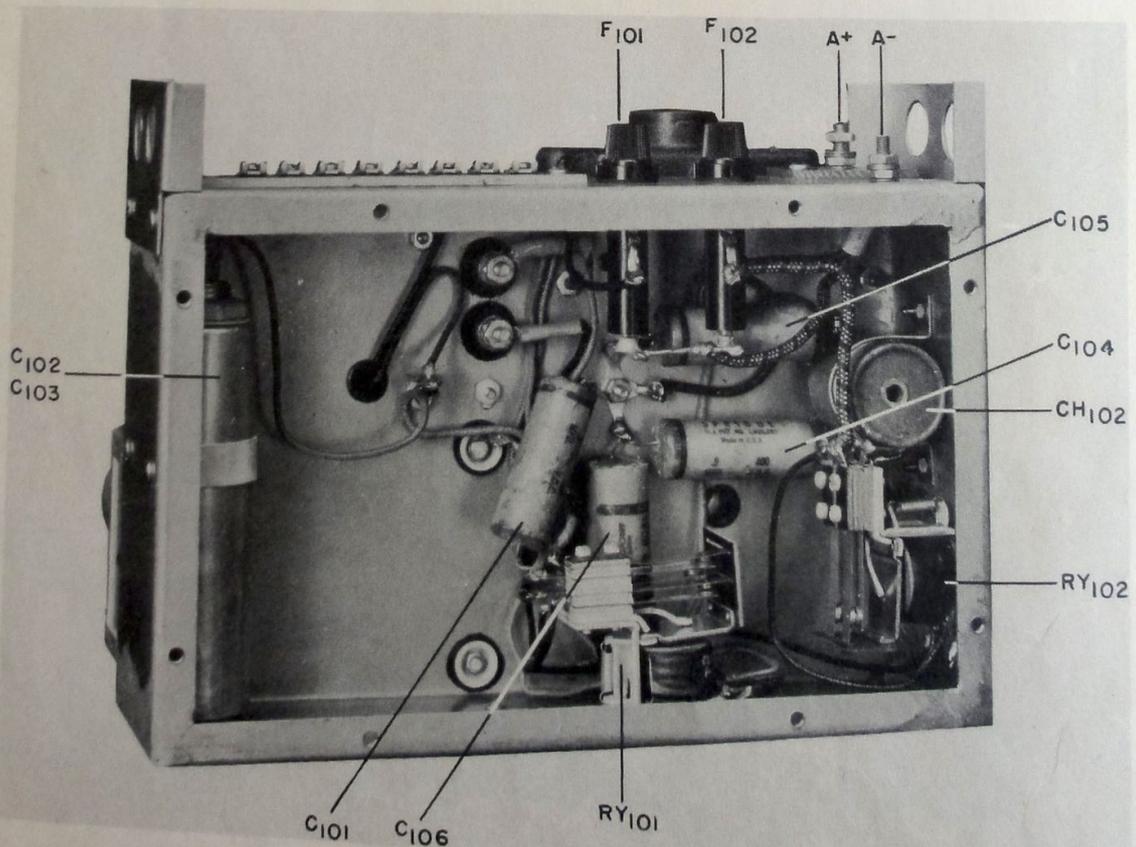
Model HT-11-B power unit, bottom view, dust cover and bottom plate removed.
